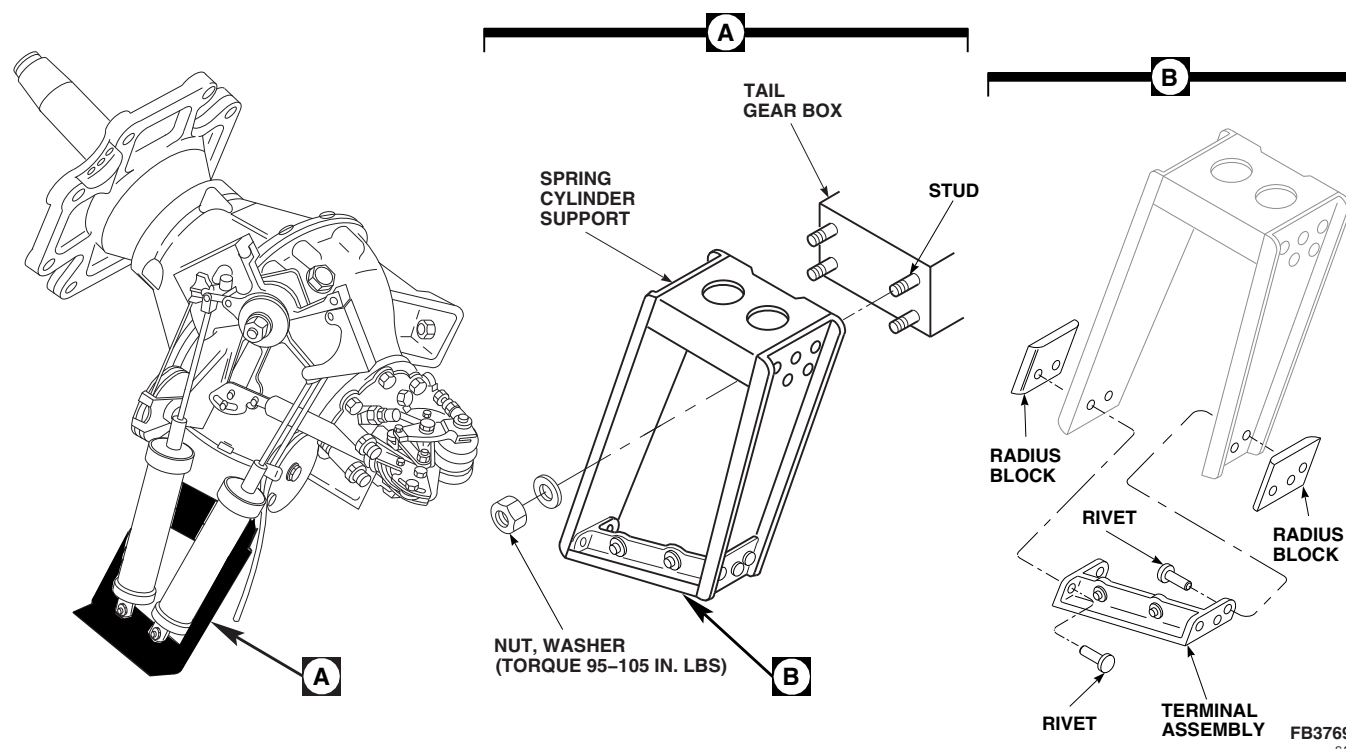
REPLACE TAIL ROTOR QUADRANT SPRING CYLINDER SUPPORT
